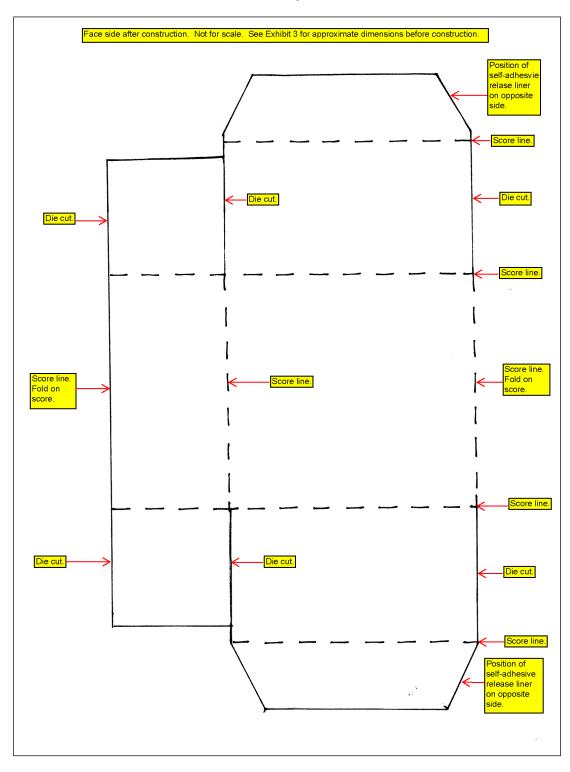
CONSTRUCTION OF BOX BACK
